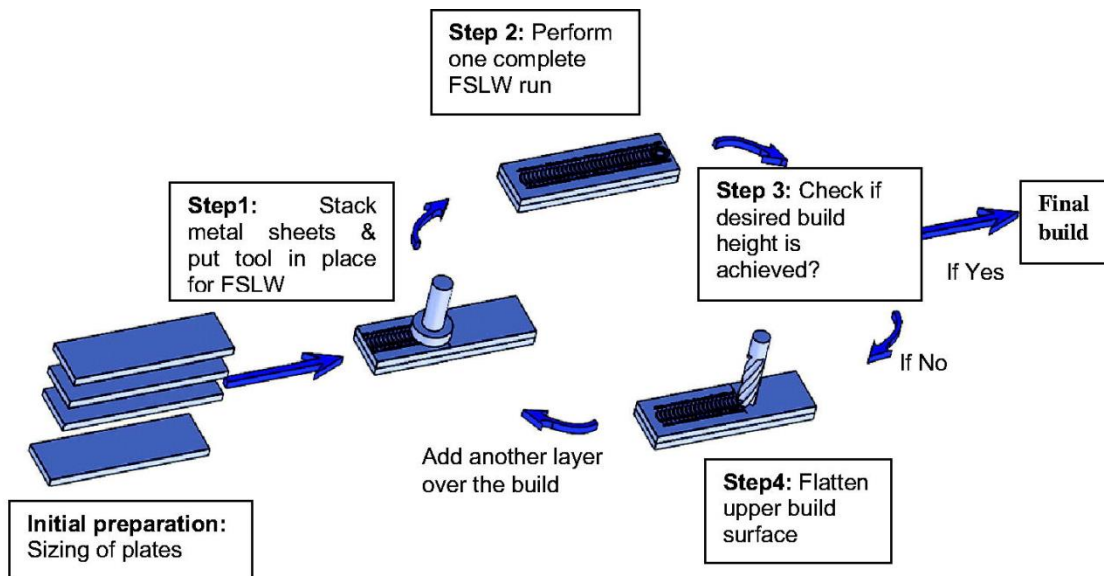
Schematic view of the FSAM_2 process where overlapped metal sheets are used, following the Friction Stir Lap Welding (FSLW) of the last sheet with the previous one or the substrate, and optional milling of the last welded sheet to prepare for the overlap by another sheet. The process is repeated until the desired height is reached [Srivastava *et al*, 2019].
